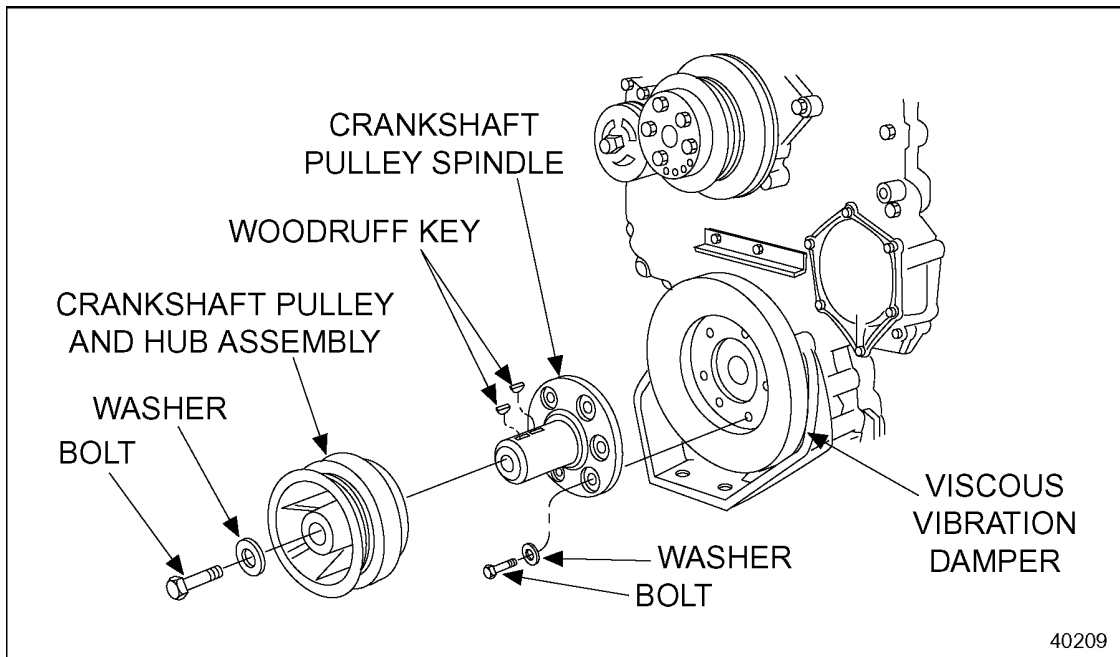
Crankshaft Pulley and Hub Assembly Installation with Spindle
